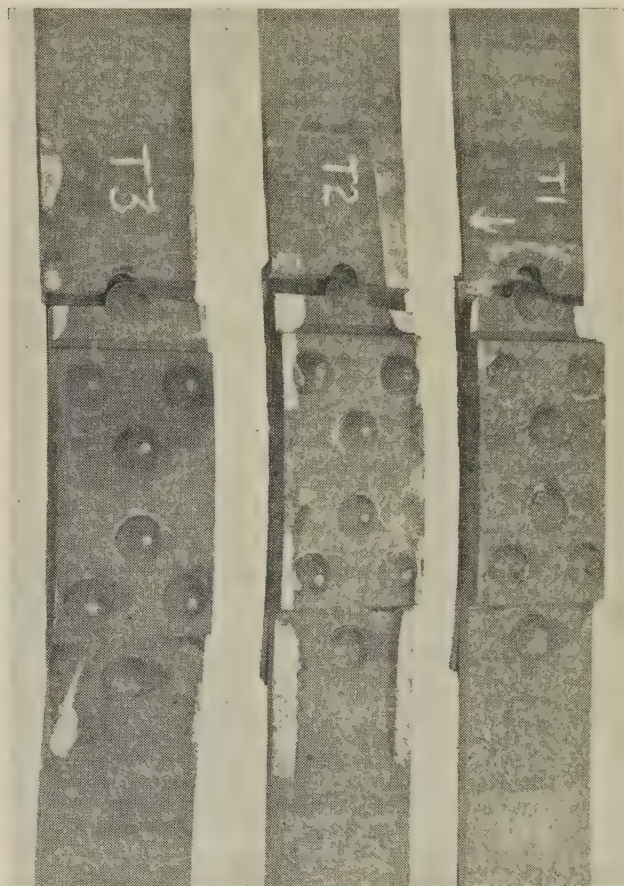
CIRCUMFERENTIAL RIVETED-JOINT SPECIMENS AFTER TESTING
